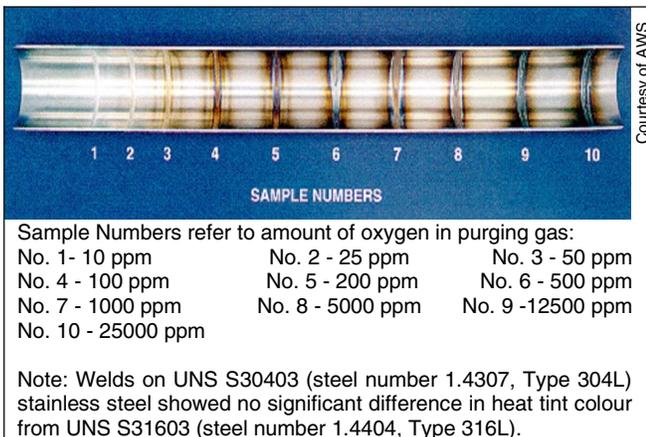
AWS D18.2 (1999)⁽⁴⁾: Heat tint (weld discolouration) levels on the inside of mechanically polished UNS S31603 (steel number 1.4404, Type 316L) austenitic stainless steel tube.
